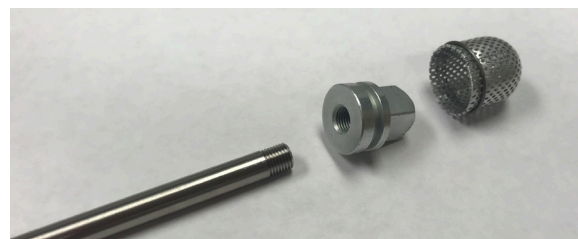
Suction tube strainer assembly; suction tube (left), strainer body (middle), strainer screen (right)
